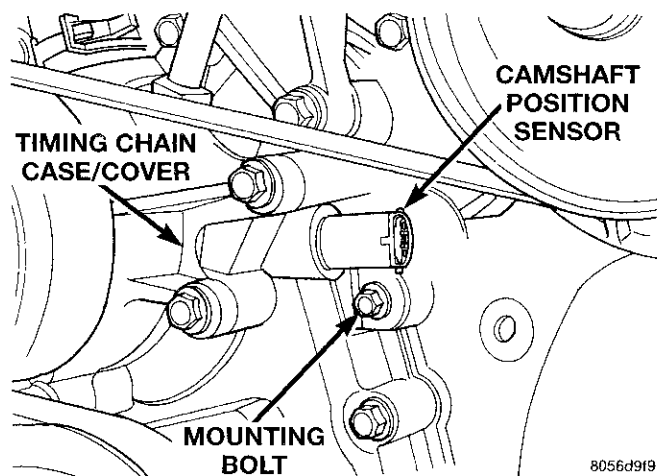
Camshaft Position Sensor Location—8.0L V-10 Engine
